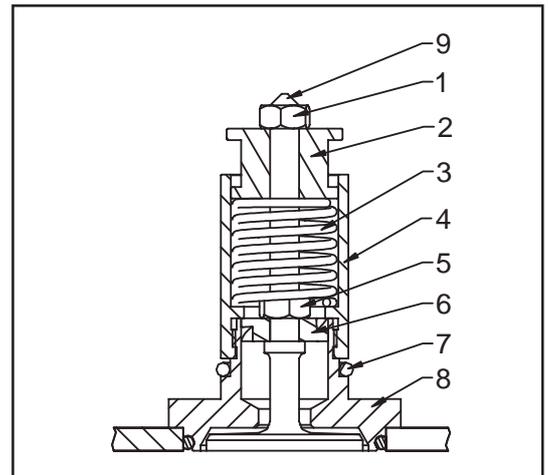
CIP nozzle type 4B mounted in the tube sheet.
